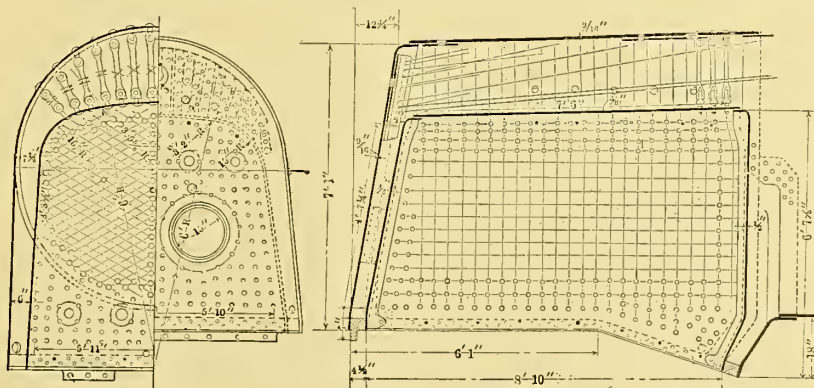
DETAILS OF FIREBOX, LAYOUT OF WHICH IS SHOWN IN FIG. 3.
